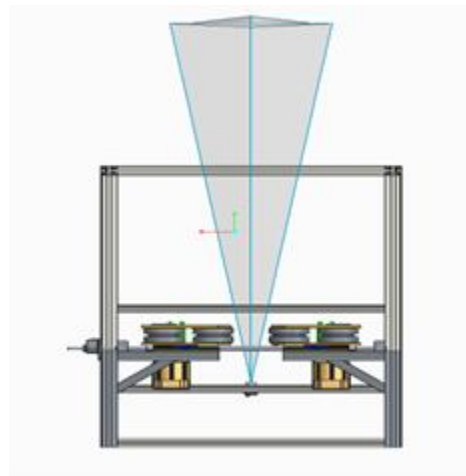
SIDE GRIP CONVEYOR WITH BOTTOM CAMERA
